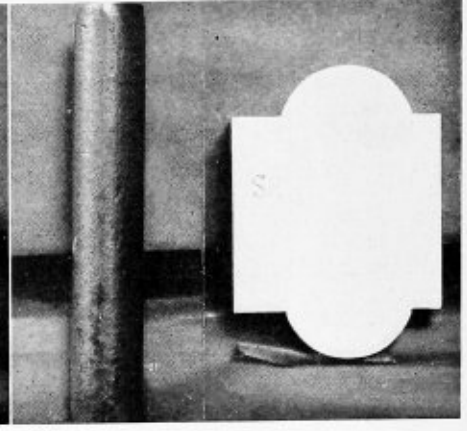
Pin rivet and section after driving on bull riveter fitted with rotary head
